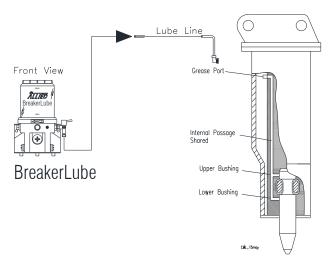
Single Feed Passage Lubricates Both Bushings
